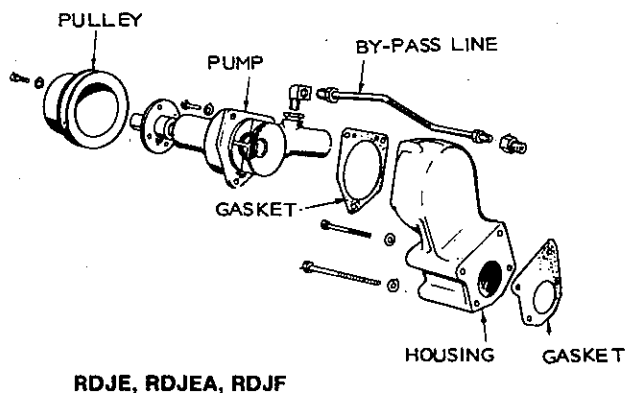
WATER PUMP—EXPLODED VIEW
